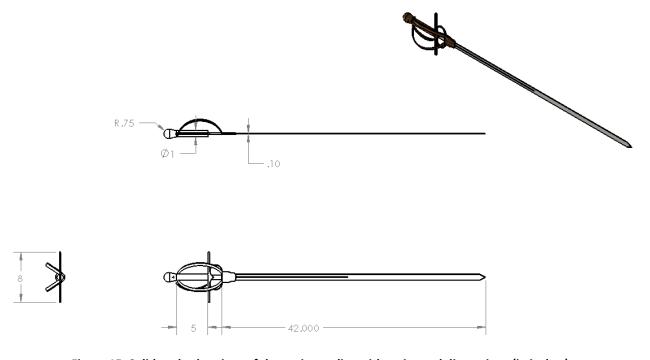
Solidworks drawings of the rapier replica with estimated dimensions (in inches).
